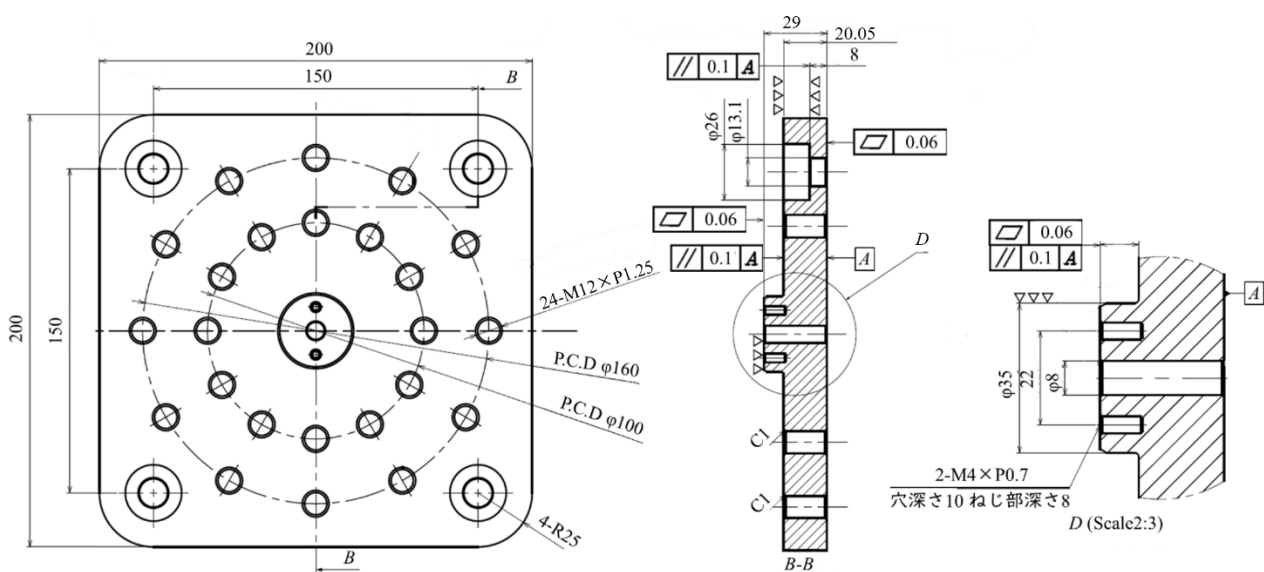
Drawing and dimensions of the plate used to fix the wheel and define the reference position of the axle center
